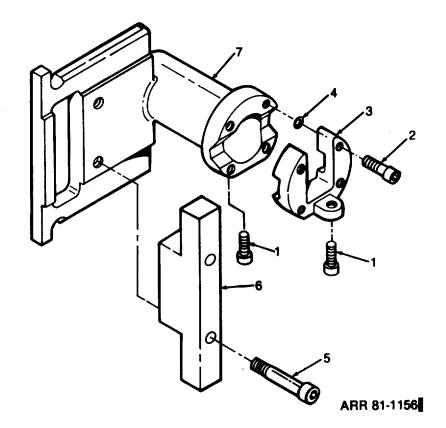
A. Adapter assembly for M101A1 - optional manufacture
